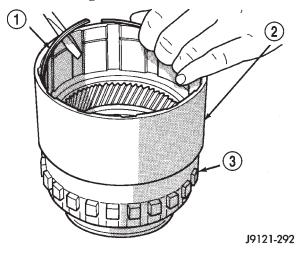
Clutch Drum Inner Retaining Ring Removal
